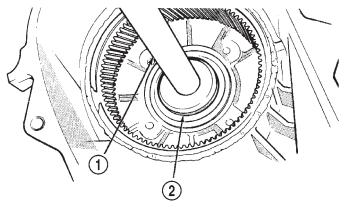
Output Shaft Rear Bearing Installation Depth 1 – BEARING (SEATED) AT LOWER EDGE OF CHAMFER 2 – CHAMFER
